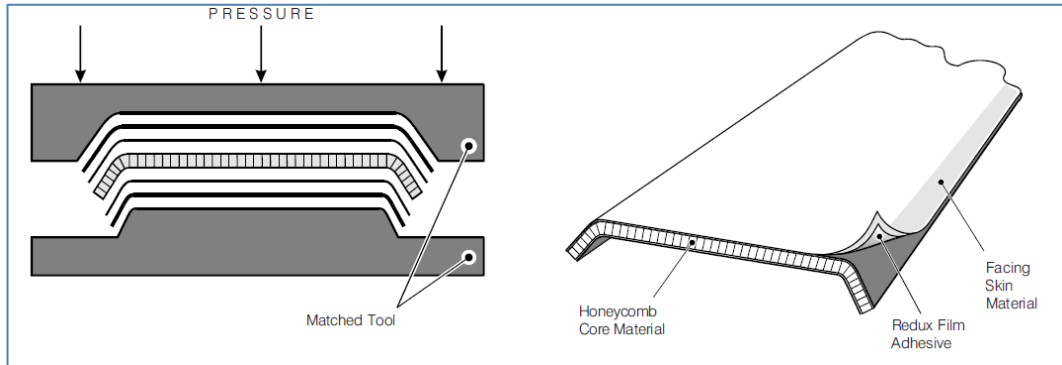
Match Mould Processing assembly for honeycombs panel (Hexweb 2000).
